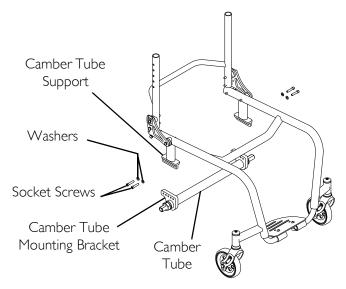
Repositioning the Camber Tube Mounting Bracket Socket Screws
